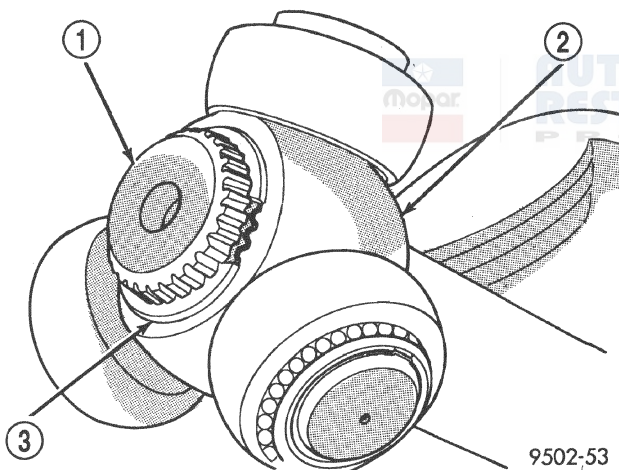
Installing Spider Assembly on Interconnecting Shaft
